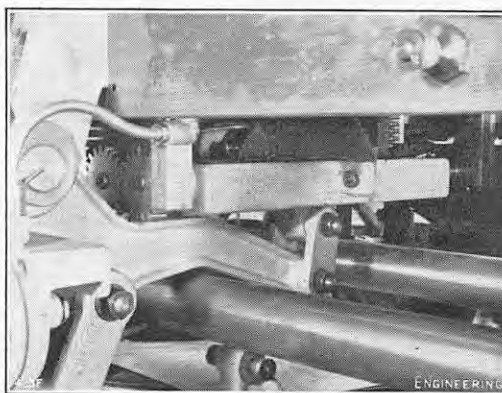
PARTLY-ASSEMBLED MACHINE, SHOWING INSERTION MECHANISM.
